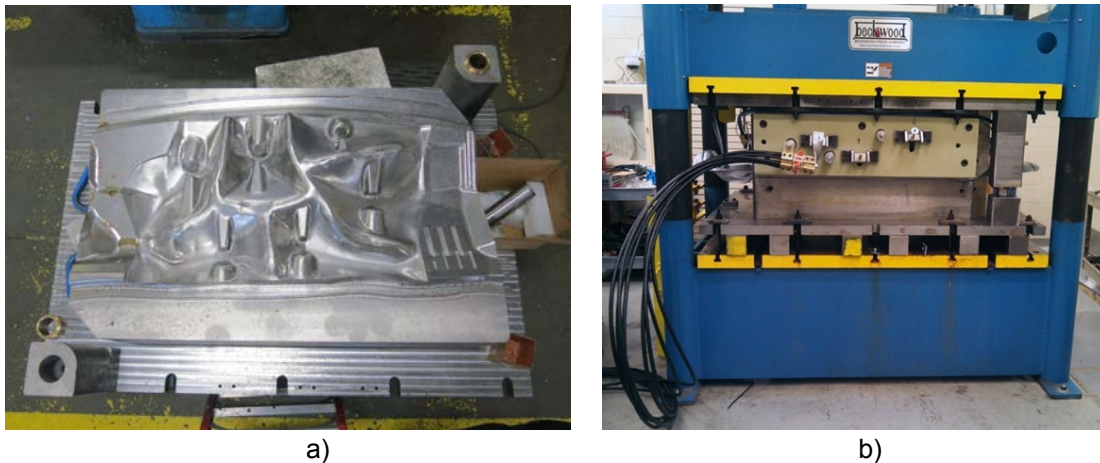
Assembled upper (a) and lower (b) preforming dies
